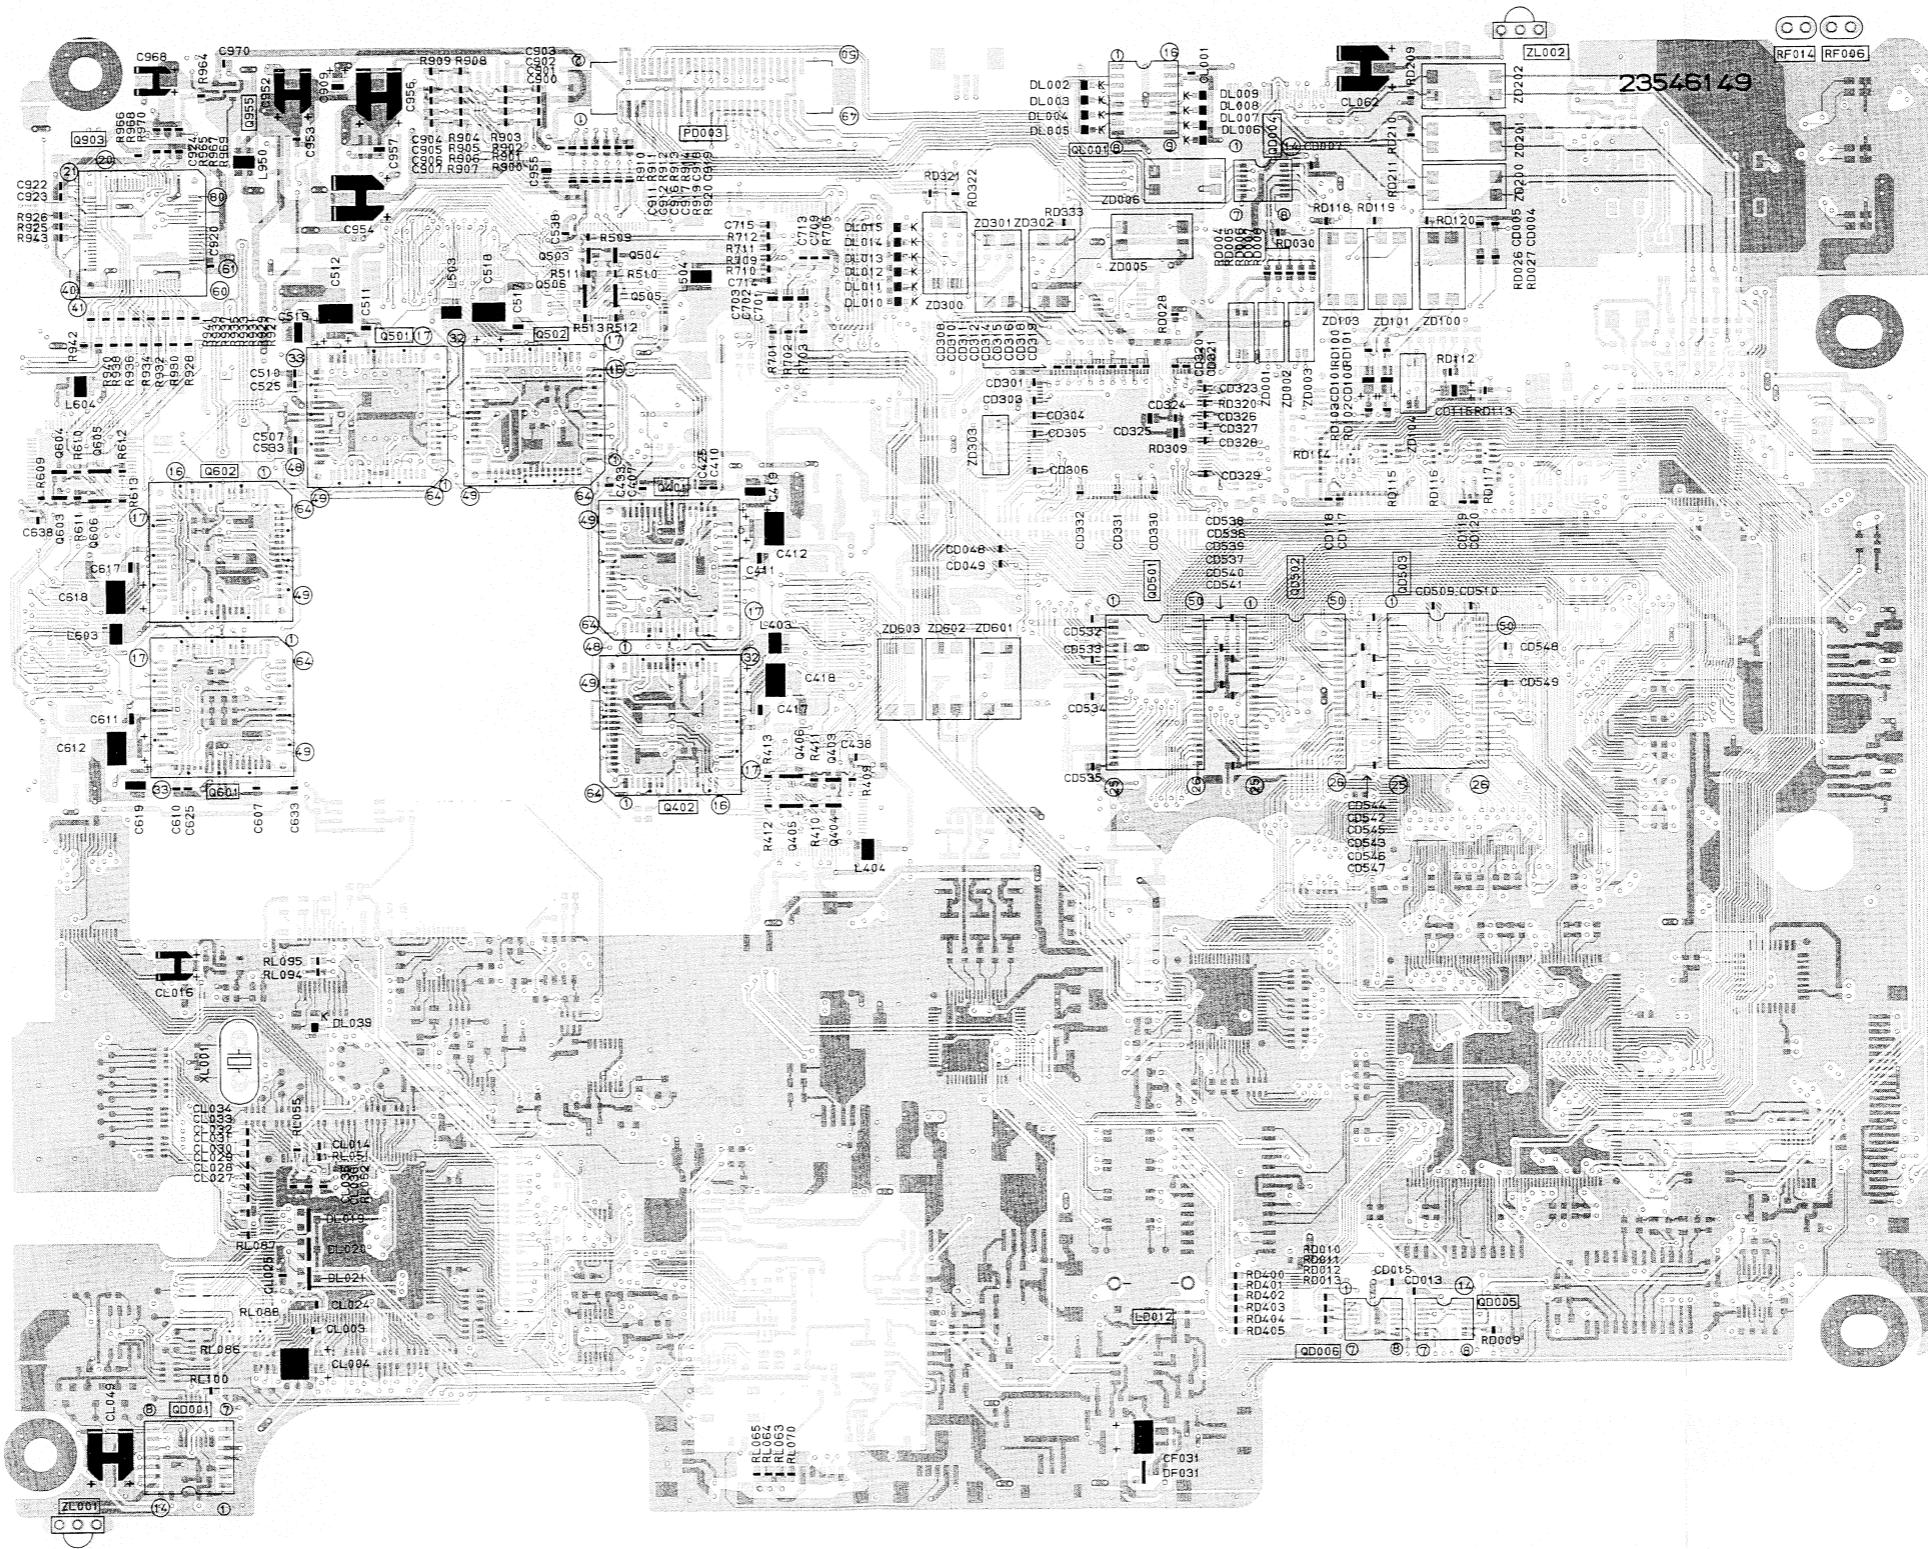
U001 Main PC Board (Bottom Side)
